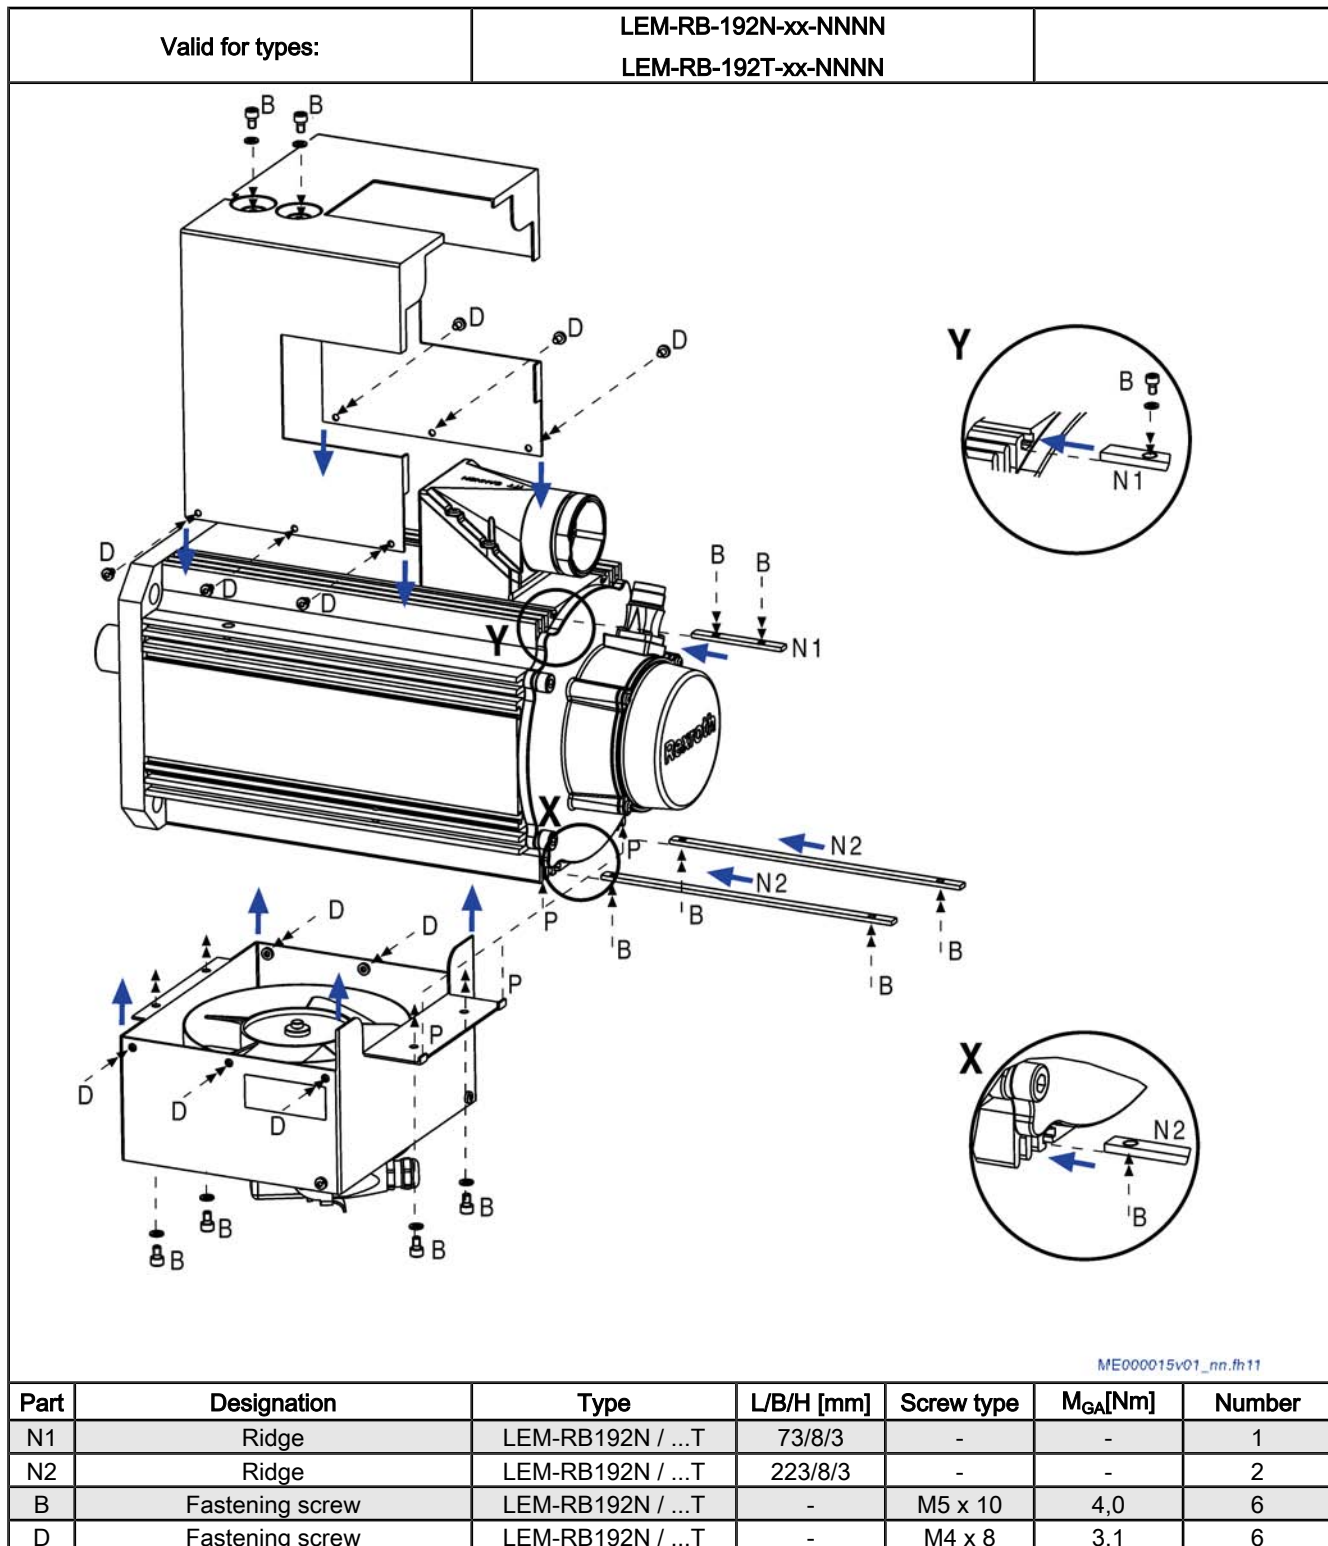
Assembly Fan Unit Radial, Flange Dimension 192
